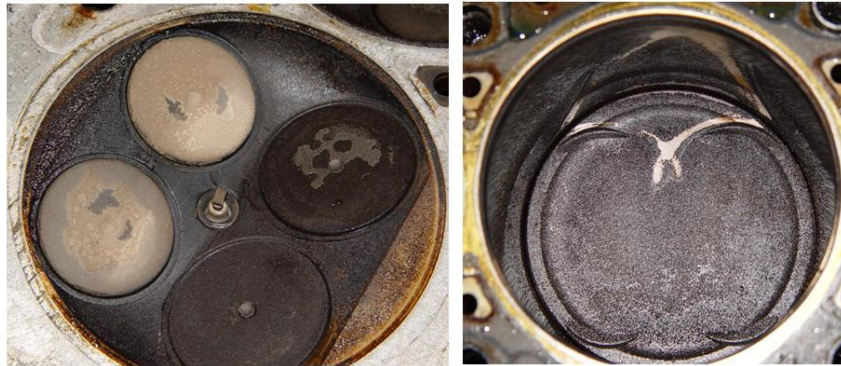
Engine combustion chamber deposits (M5 Board, [S.a.])
